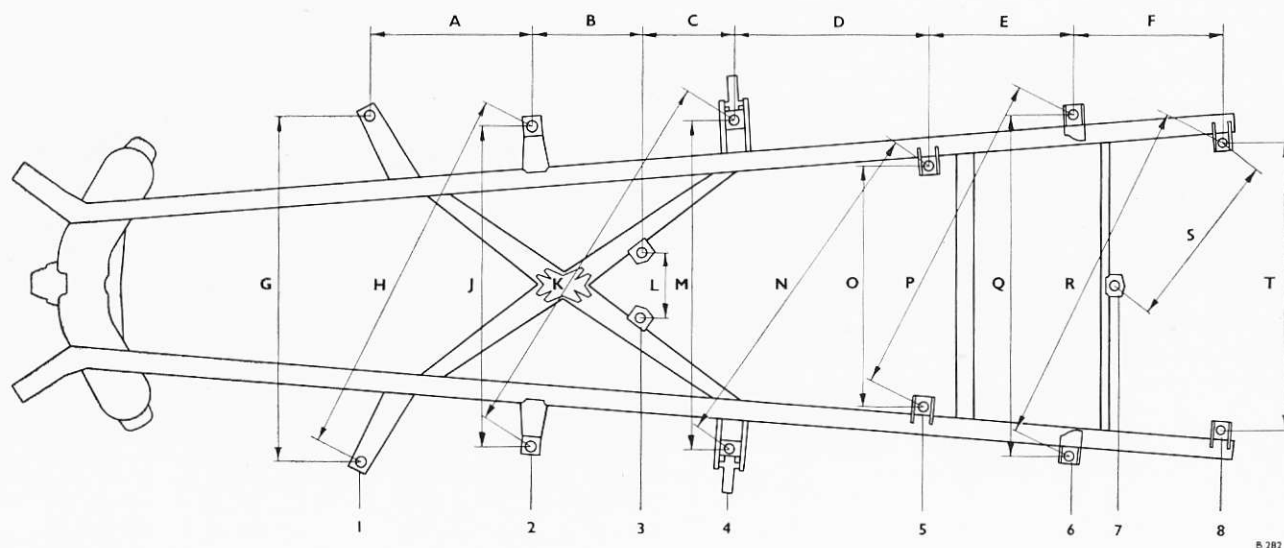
Chassis frame and body checking dimensions for all S1 cars except Long Wheelbase
